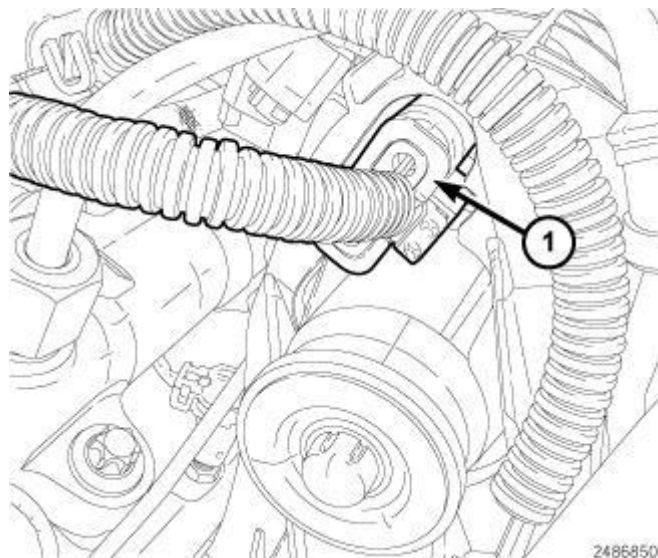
Accessory Drive Belt Tensioner & Bolts
